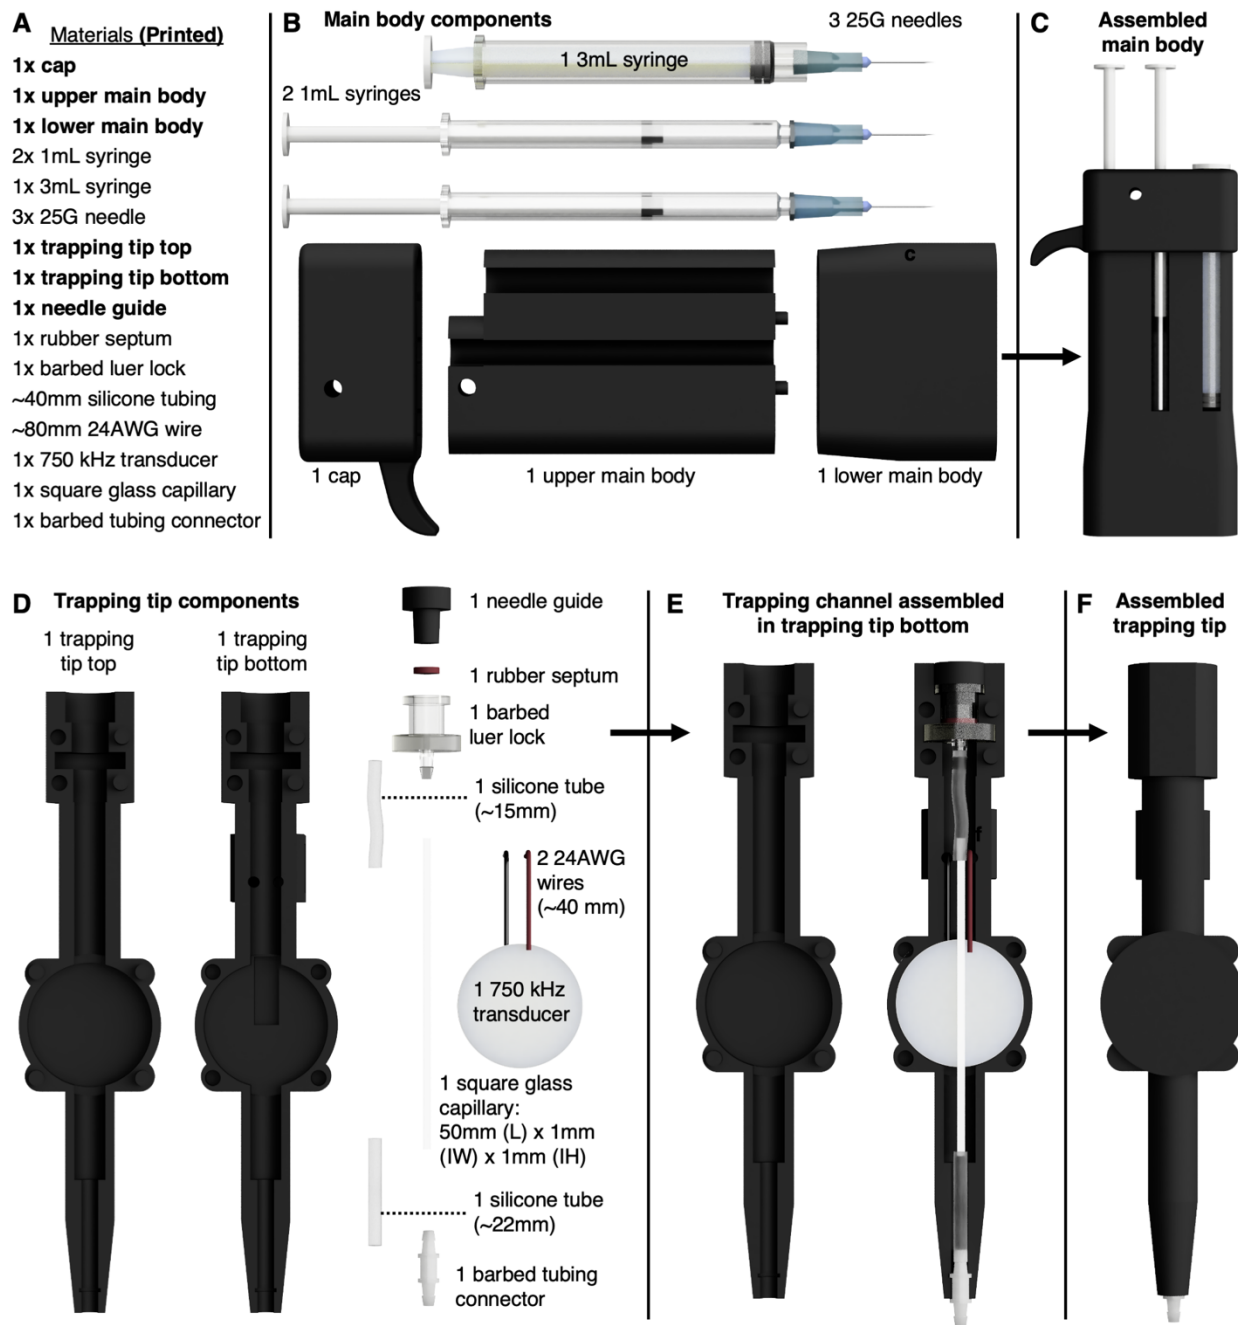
Materials for acoustic pipette assembly. (A) List of pipette components needed for acoustic pipette assembly, with 3D printed components denoted in bold text. (B) Render of disassembled main body components. (C) Render of assembled main pipette body. (D) Render of disassembled trapping tip components. (E) Render of assembled trapping channel in trapping tip bottom. (F) Render of assembled trapping tip.
